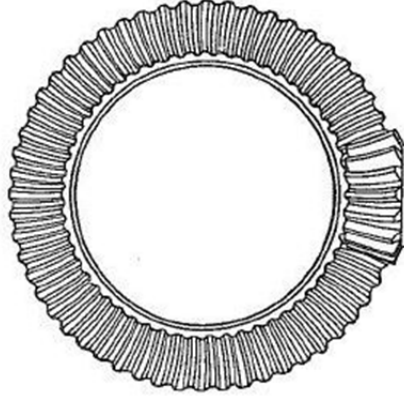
Zerol Bevel Gear (Kohara Gear Industry Co)
